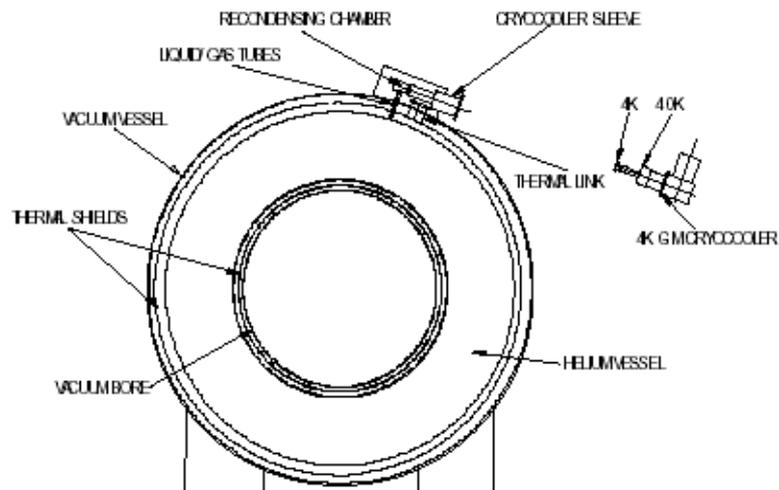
Structure of magnet with a 4-K GM cryocooler
